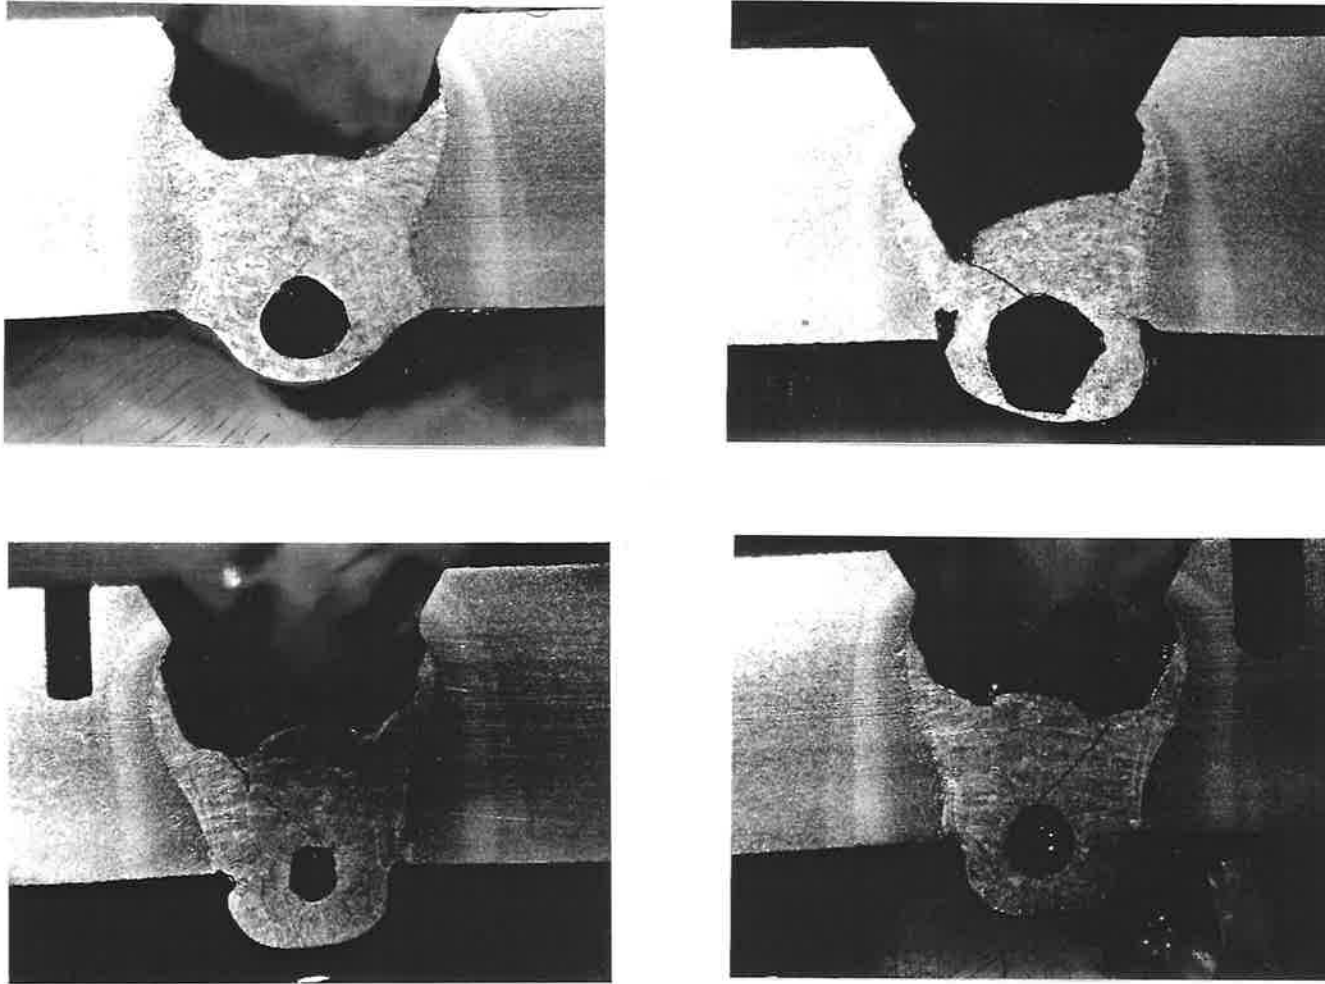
Macrographs of weld cross sections showing hollow bead pores in the reinforcement region. The welds were made in API X80 steel using cellulosic electrodes 4.0mm in diameter and E9010 specification during WIC cracking tests.
